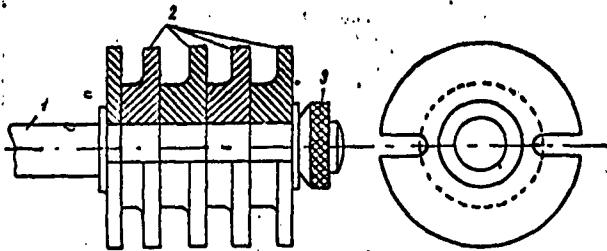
Spool for winding sections of stator winding. 1) Chuck; 2) spool; 3) nut.
